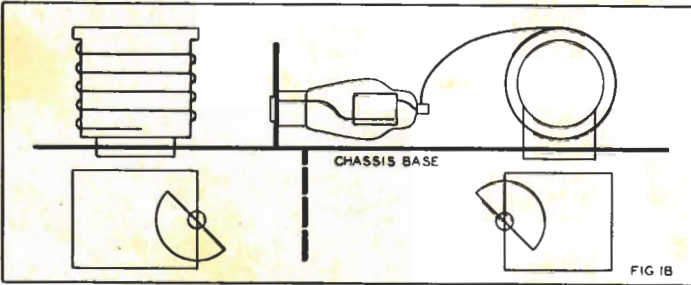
A preferred mechanical layout for the same tube which reduces feedback to a minimum.
